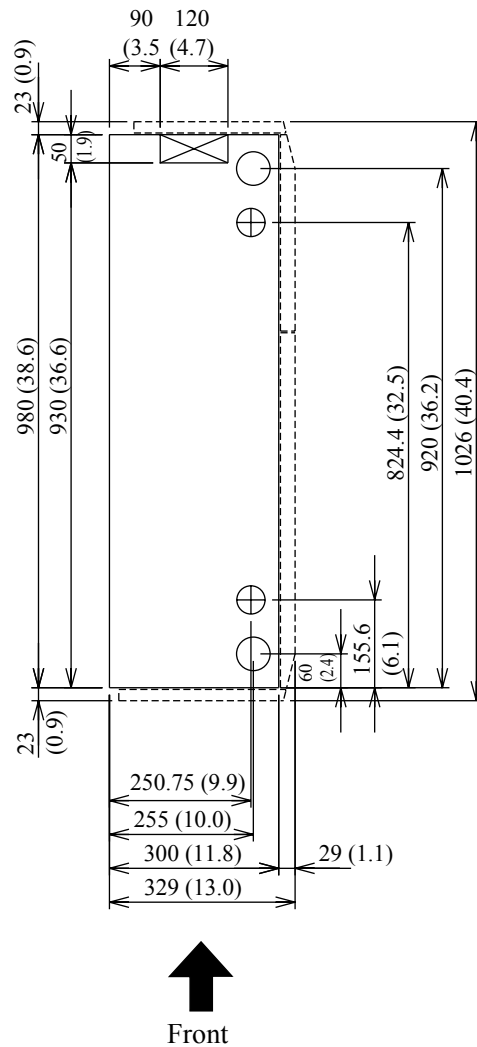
PRIMEQUEST 580A/540A/580/540/480/440 floor plan
